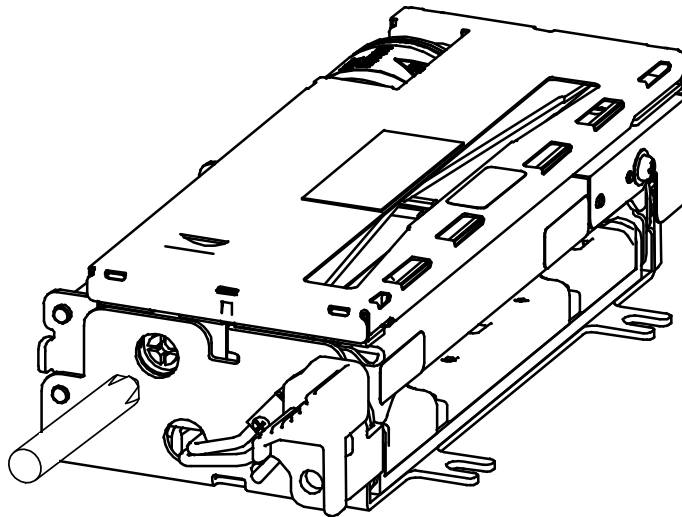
Release Procedures When Cutter Motor (Movable Blade) is Locked
